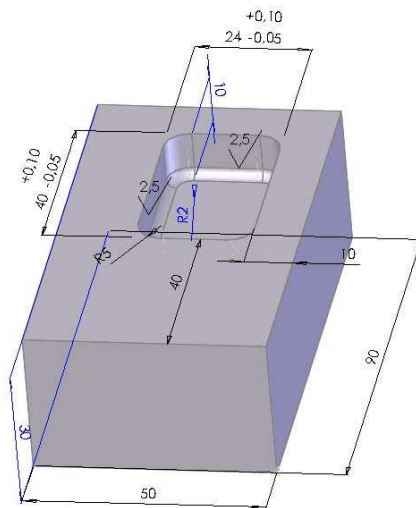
Starting CAD 3D model for the procedure of distinguishing machining features
